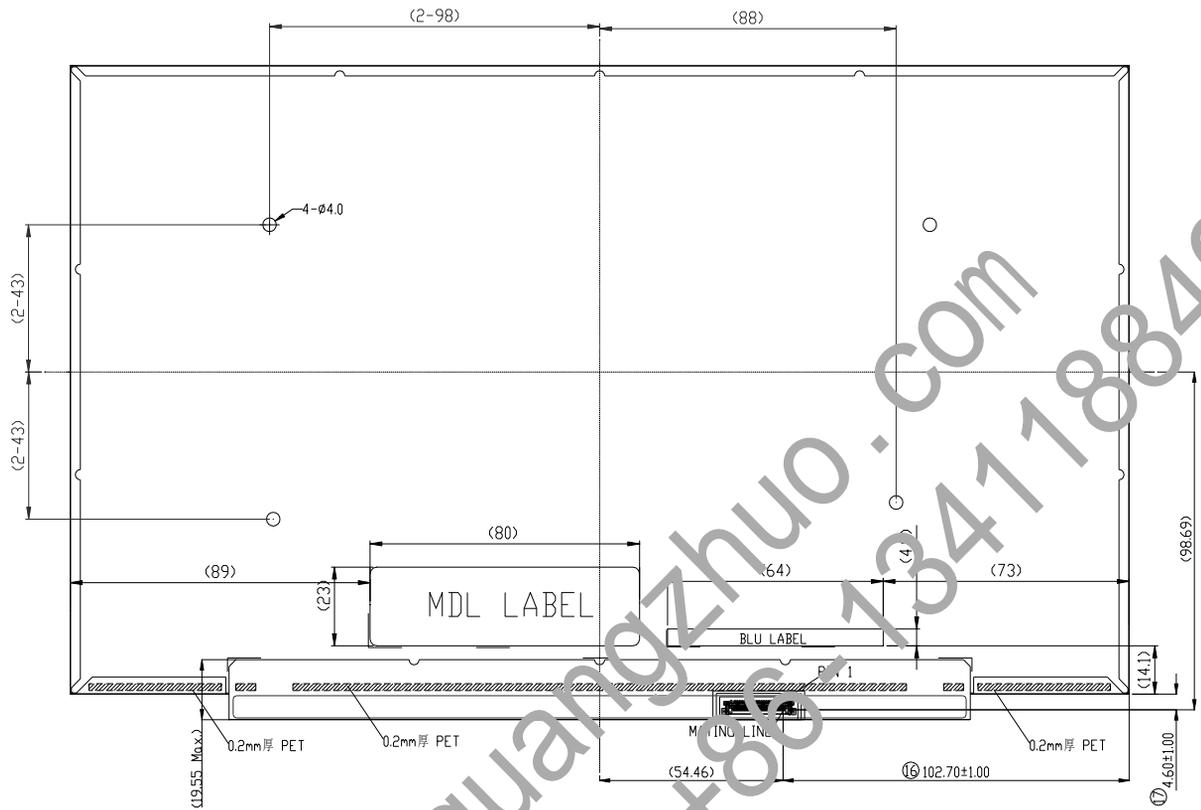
TF-LCD Module Outline Dimensions (Rear view)
